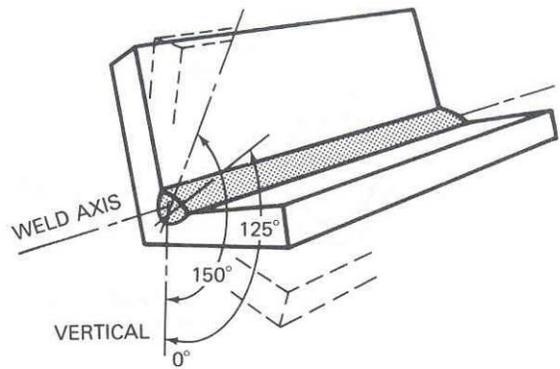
Diagram of Fillet Welding Position Ranges on Plate¹⁴
